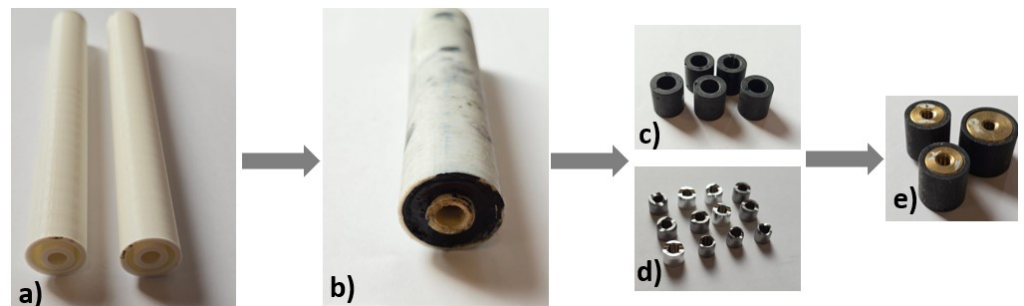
Steps for specimen preparation- a) PLA 3D printed hollow tubes used as molds; b) Carbon composite material molded inside PLA tubes; c) The molds are turned into small cylinders to host intermediates, and d) intermediates are machined at different diameters; e) intermediates are pressed in composite tubes in a press fit assembly and ready for test
